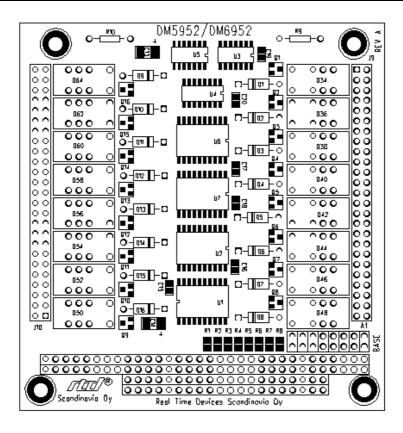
Board layout showing jumper locations (Figure shows DM6952HR board)
